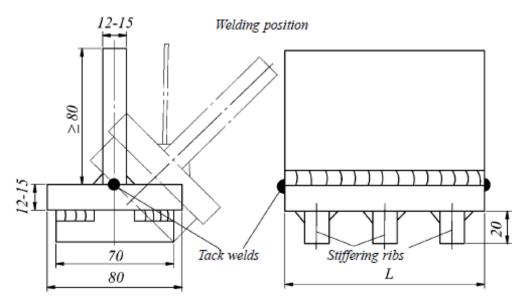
Tee-joint test assembly for hot cracking test of welded joint
